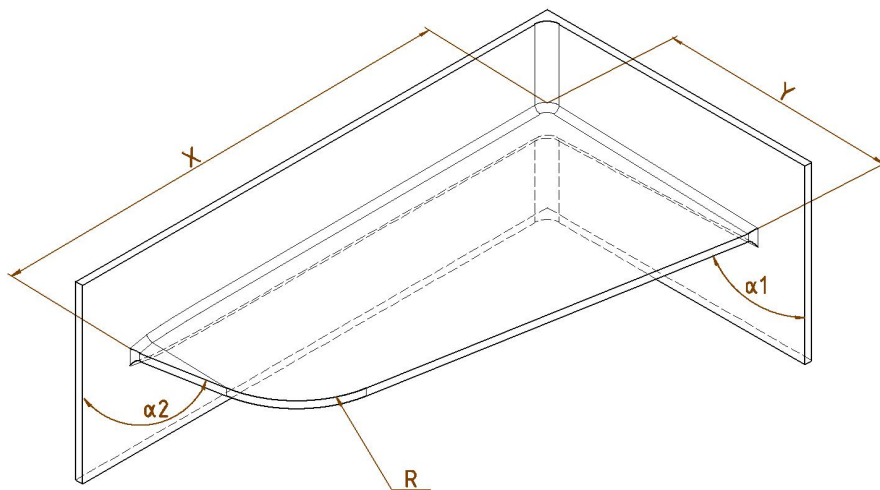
Drawing of model 1 single rib with corner (M1 single corner) with the parameterized dimensions.
